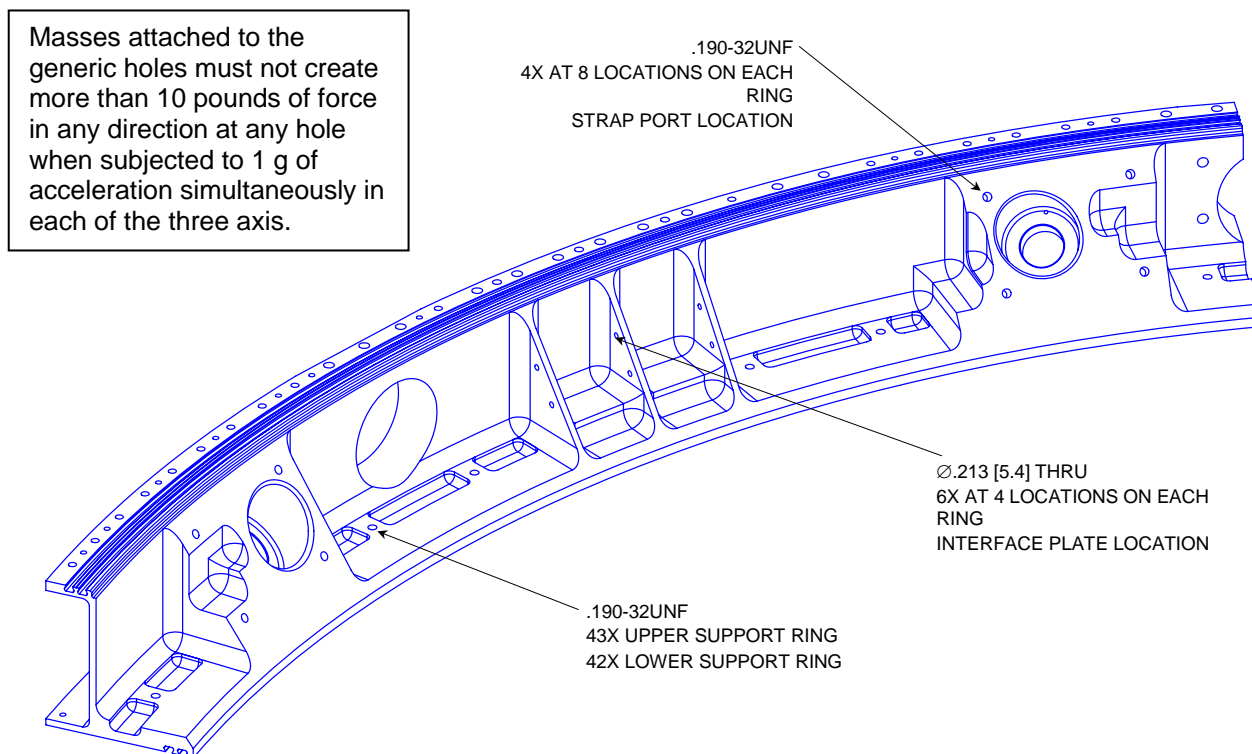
ISO View Section of Generic Holes for CM
